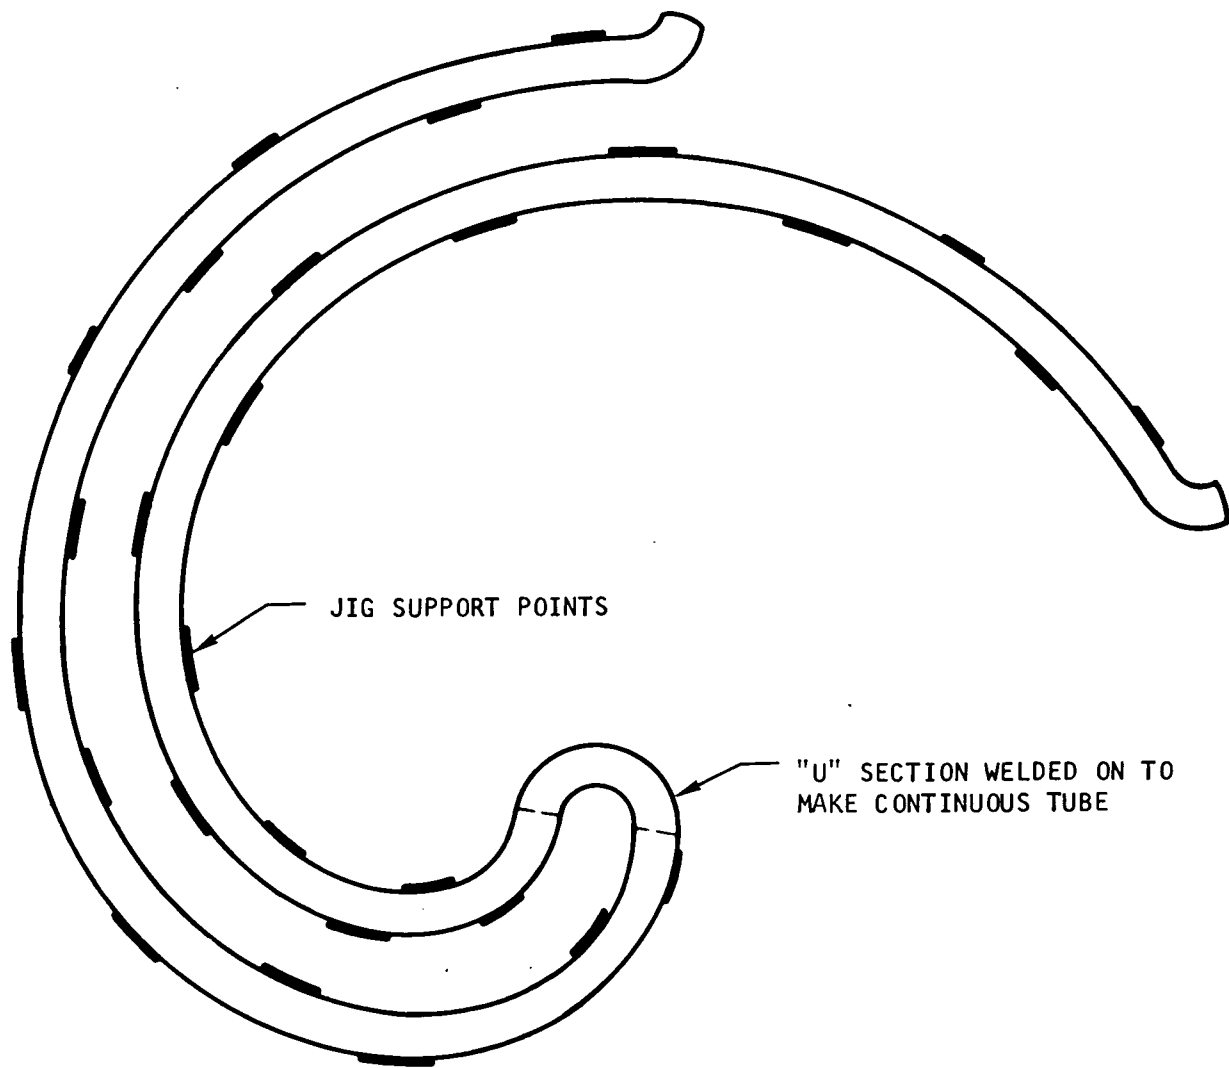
Fabrication of Tube Set (9 Required)
